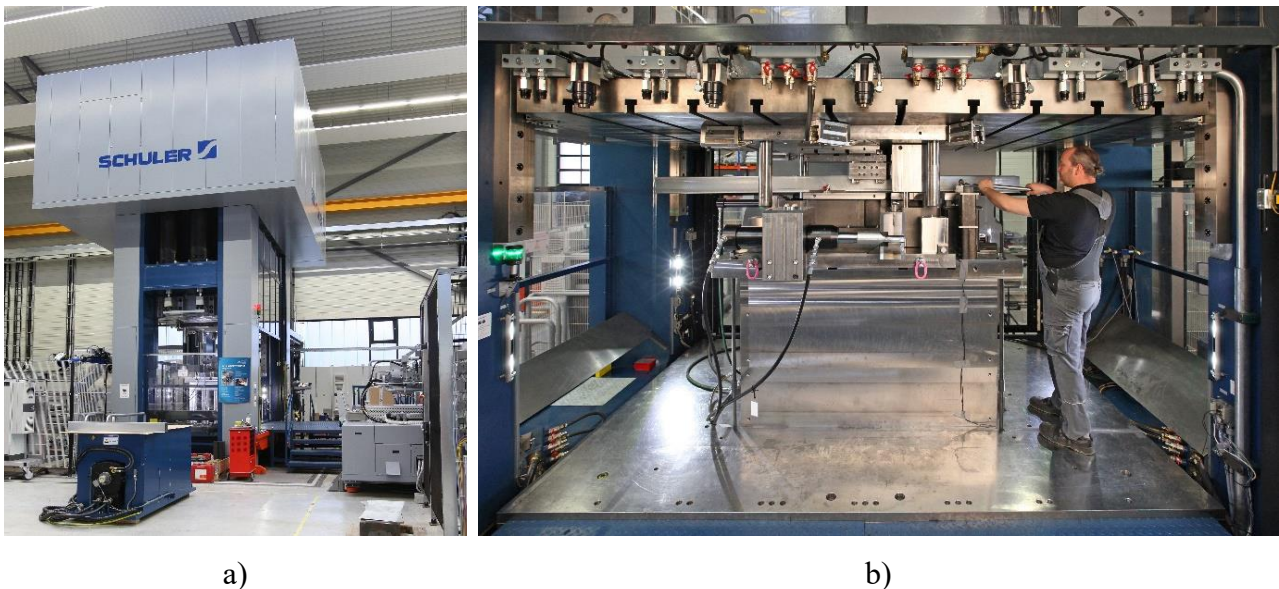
a) Servo-mechanical press at the AUTOMOTIVE CENTER SÜDWESTFALEN. b) Clearance of the SCHULER MSE, equipped with the industrial-scale ISB tool.
